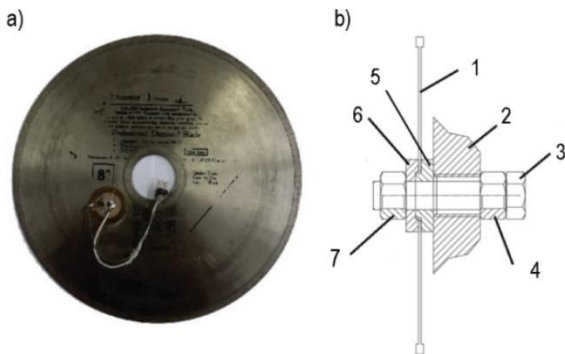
a) Test diamond circular blade, b) Drawing of the diamond circular blade in the fixture. 1 - diamond circular blade, 2 - clamping case, 3 - threaded rod, 4, 7 - bolts, 5,6 - pressure washer
